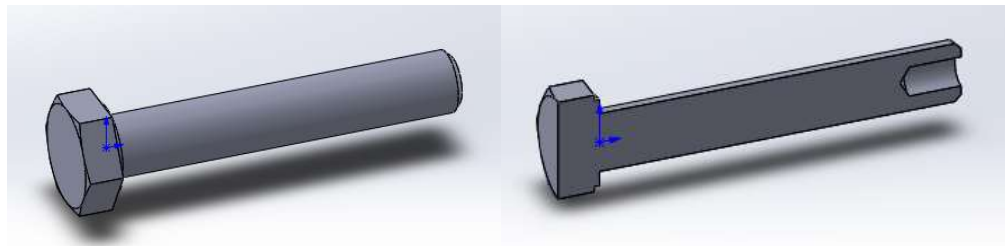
ISO 4017 M6 Piezo Mechanized CAD
